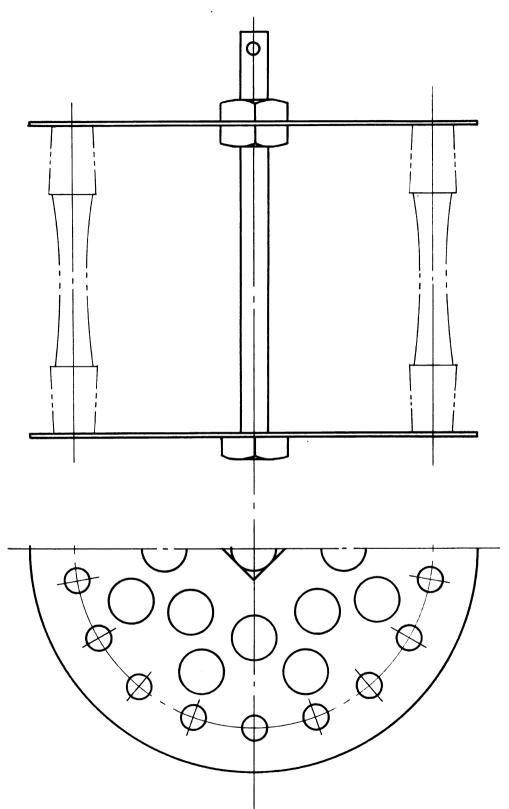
Quenching Fixture for Holding 18 Fatigue Specimens
